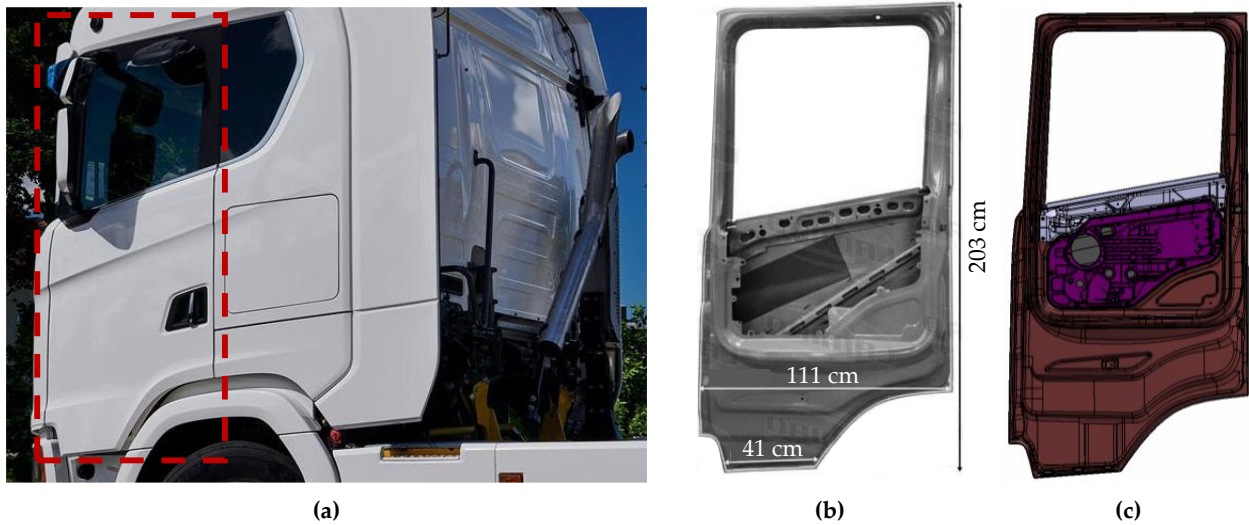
(a) SCANIA AB R-Series truck door, (b) Metal door frame, (c) CAD drawing highlighting the composite door module in purple.
